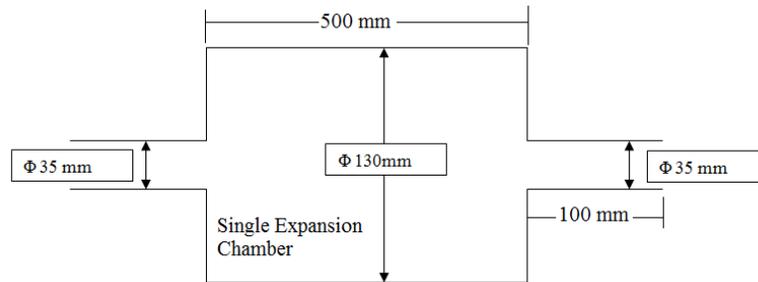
Geometry of Single Expansion Chamber Test Muffler.
